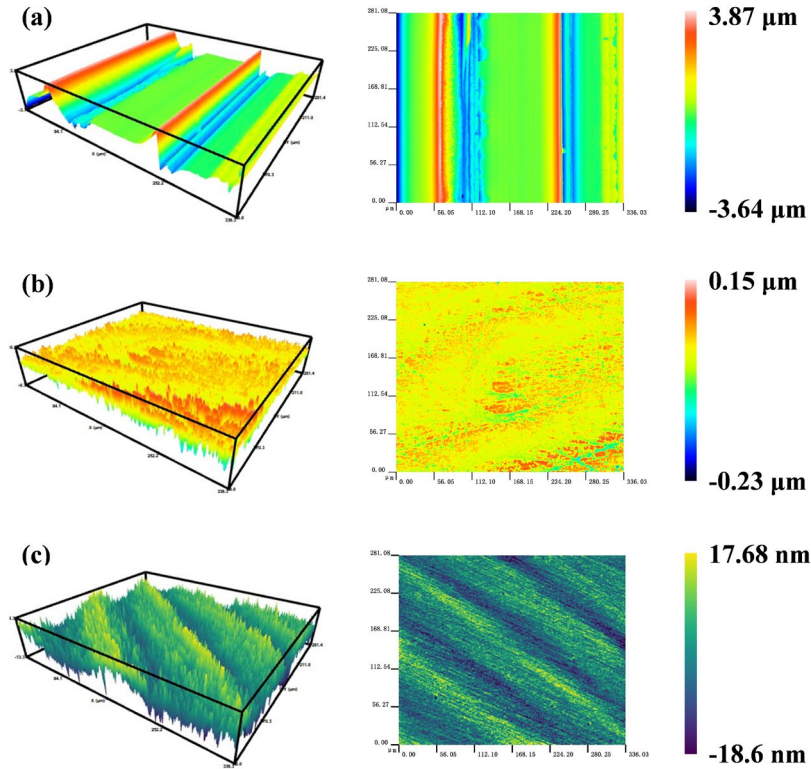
Surface morphologies of the Si-face of 4H-SiC wafers: (a) as-received surface; (b) after grinding with #800 diamond wheel; (c) after fine grinding with #8000 diamond wheel.
